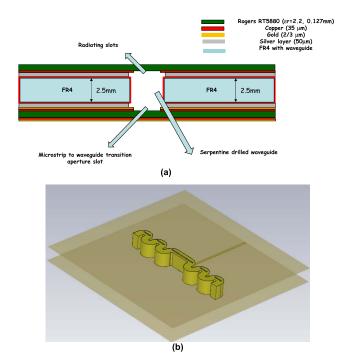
Manufacturing of serpentine slotted waveguide using a PCB etching process – (a) Stacking of the different layers to manufacture the final prototype, (b) 3D structure (CST View).
